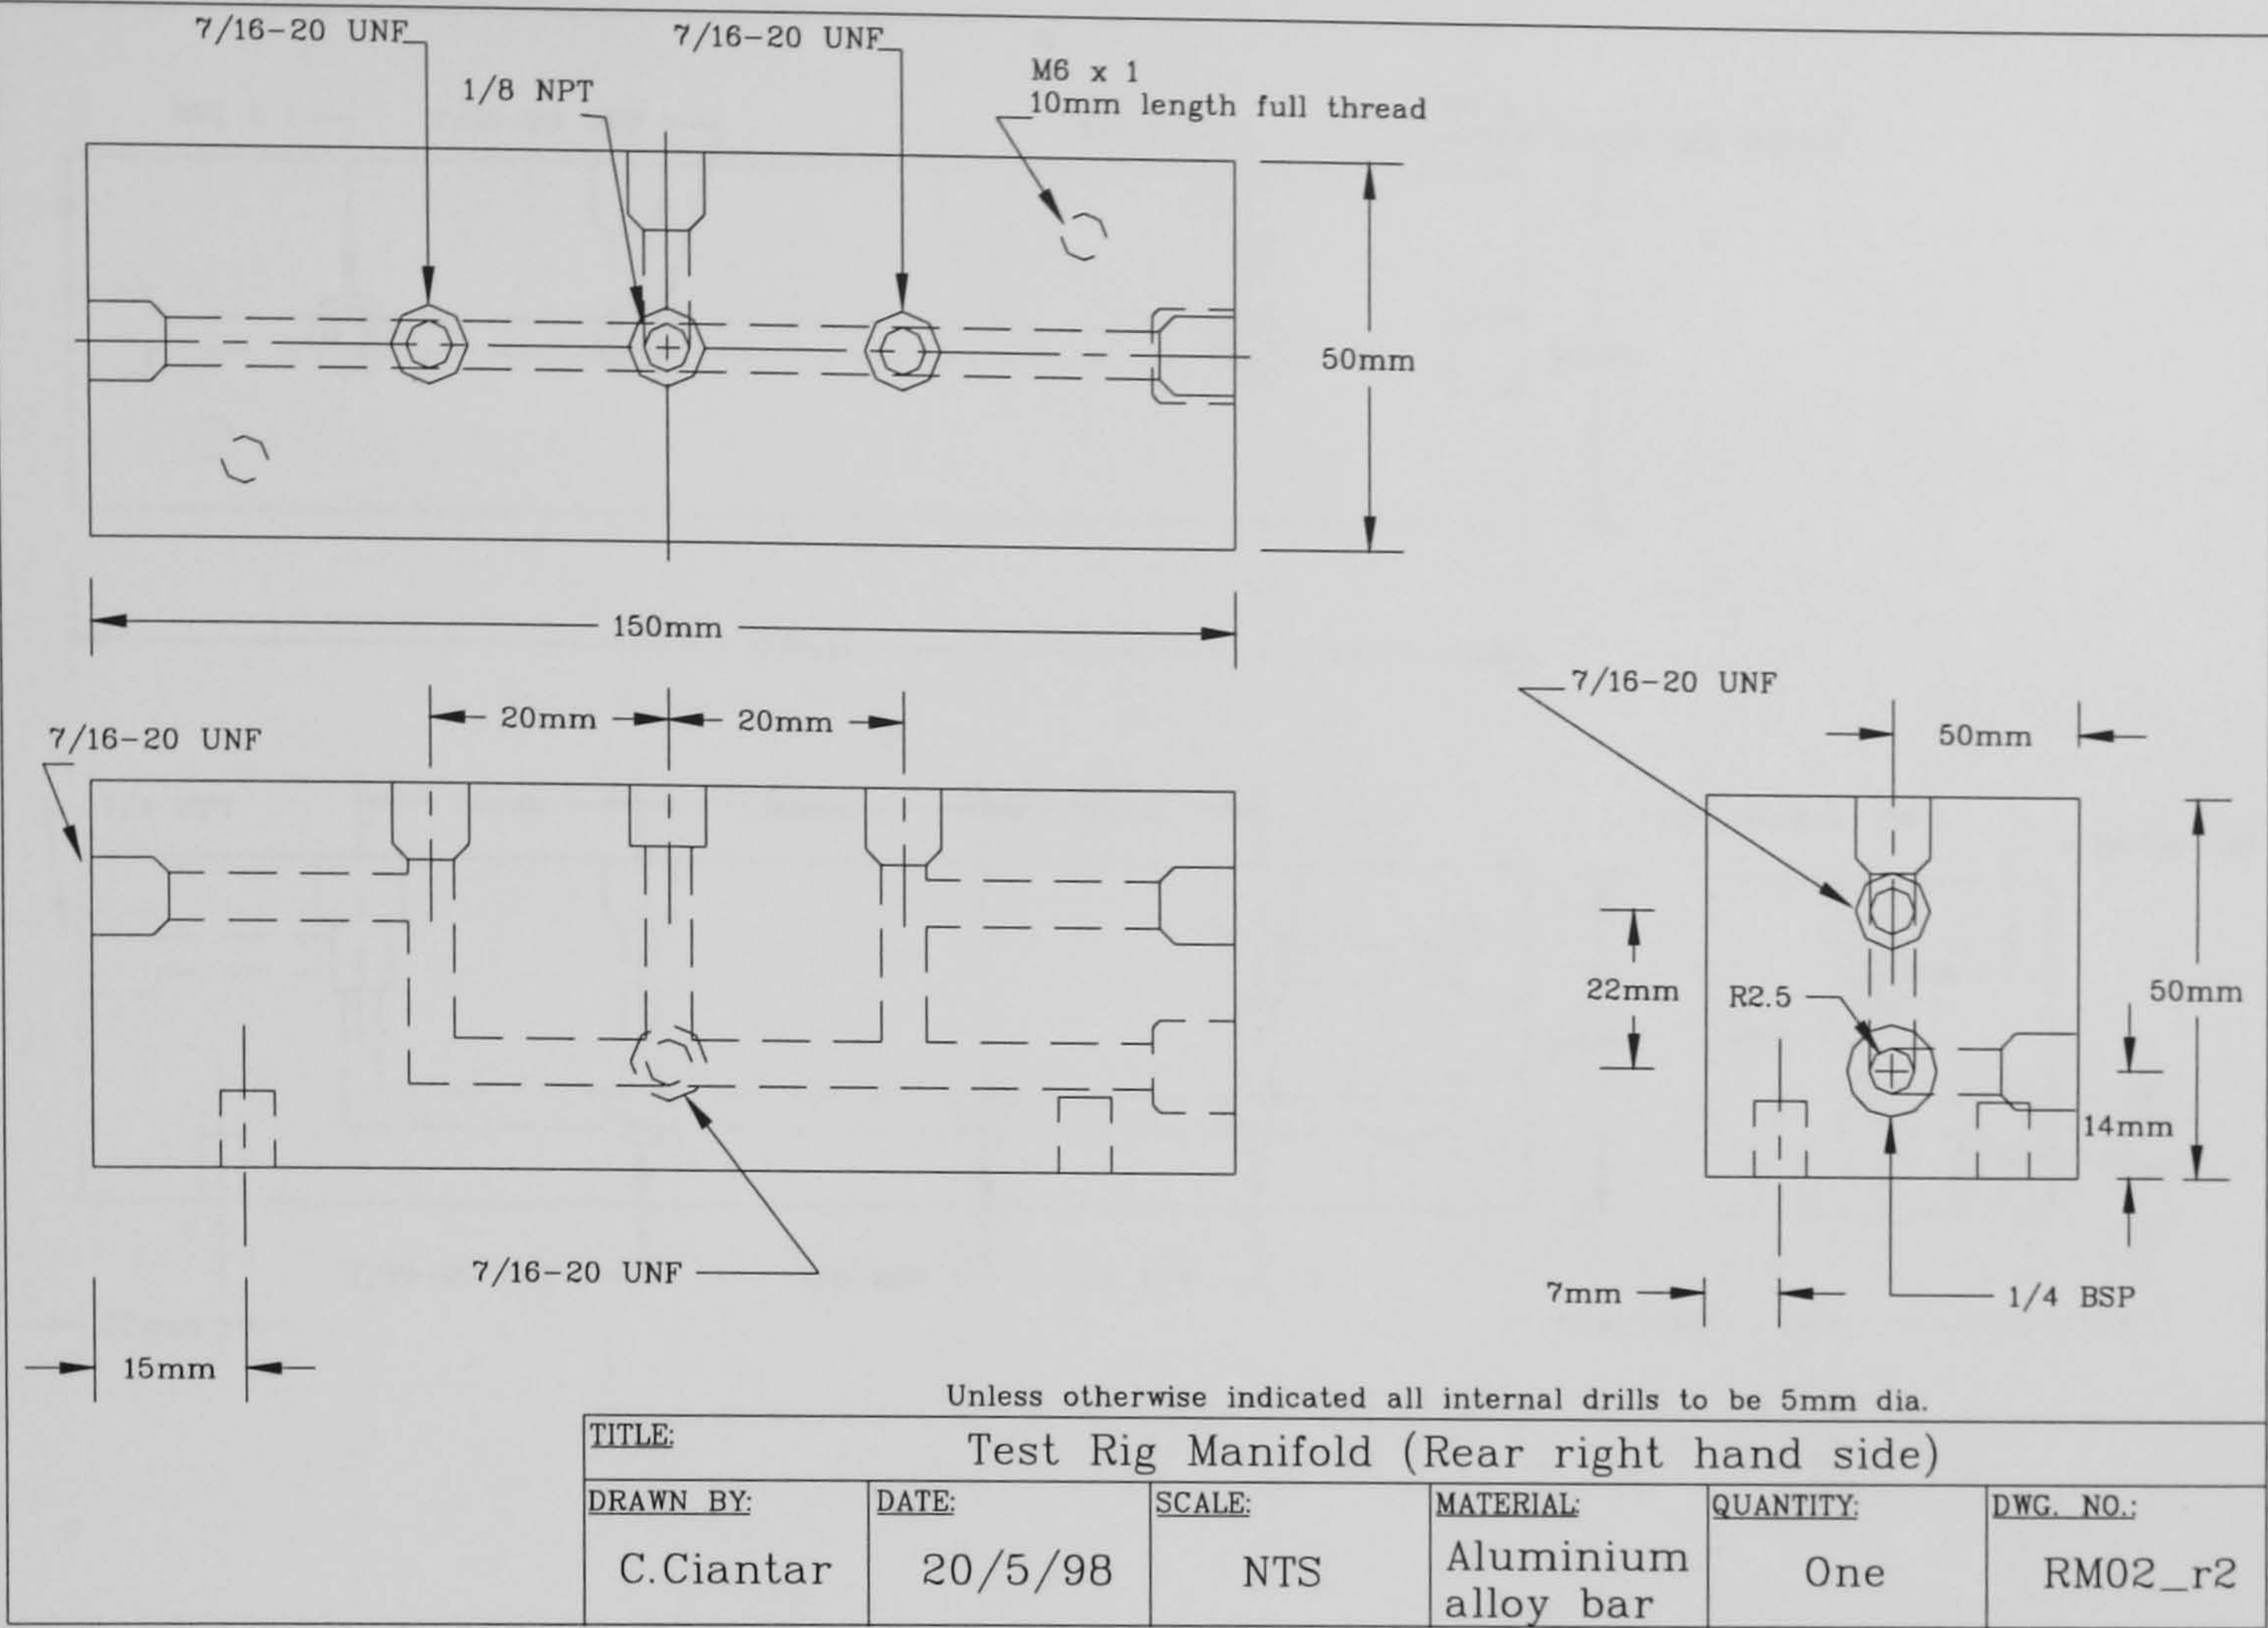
Manifold on rear right hand side (see Figure 2.1)
